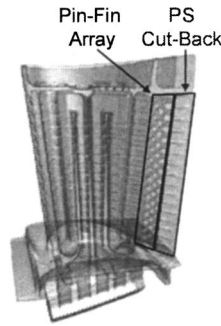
Cross-sectional view of a turbine blade with pressure side cutback
